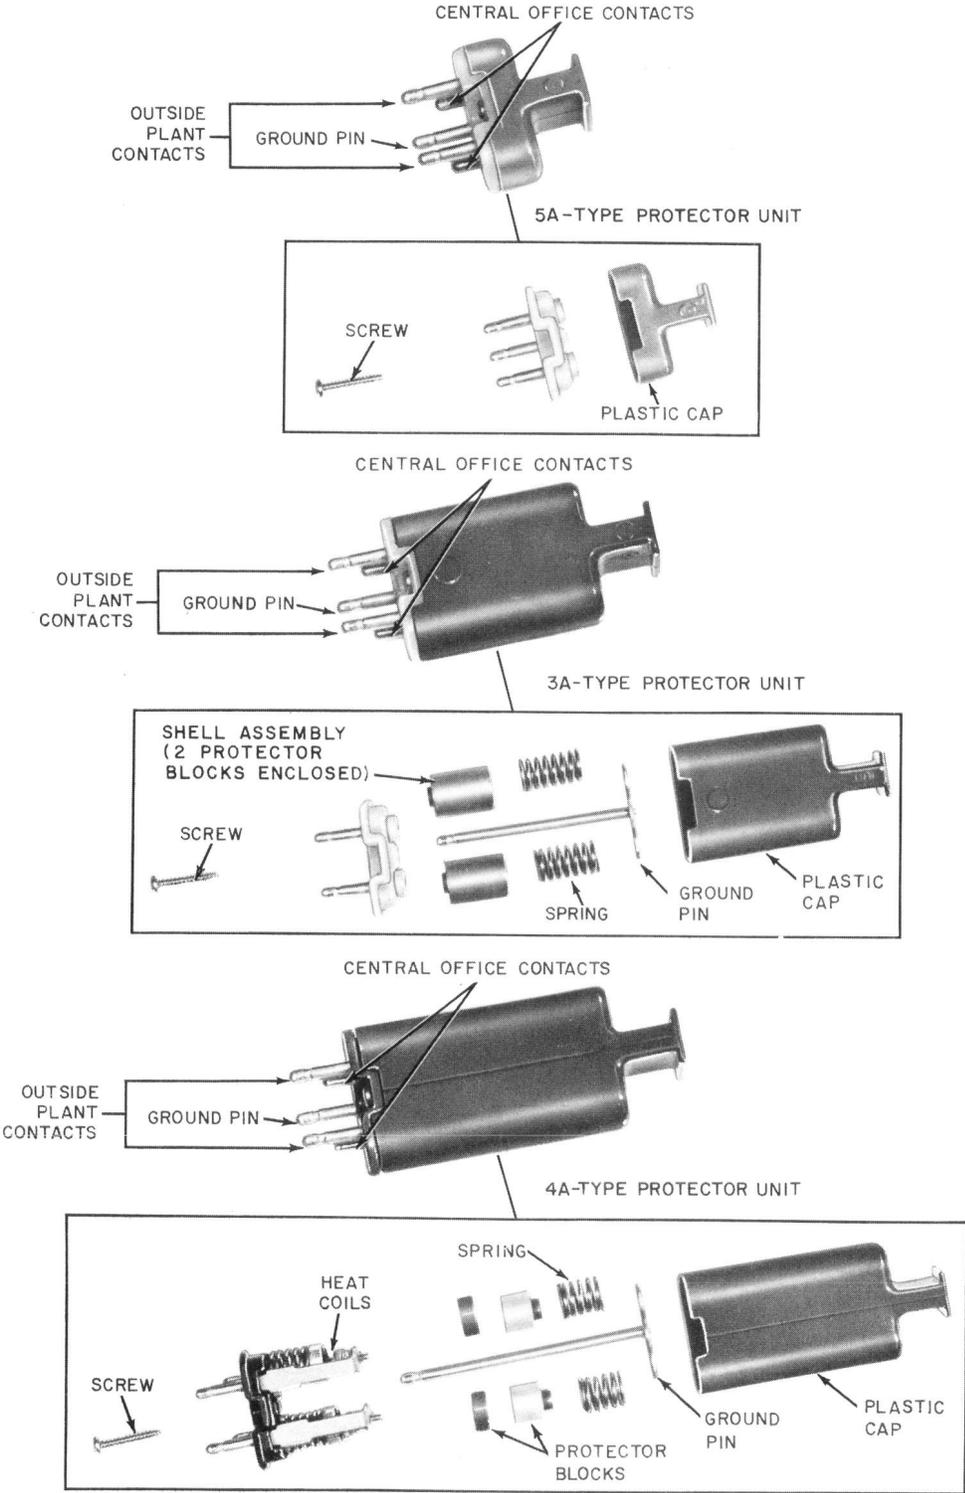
3A-, 4A-, and 5A-Type Protector Units For Gold Plated Terminal 302-Type Connectors (Manufacture Discontinued)
